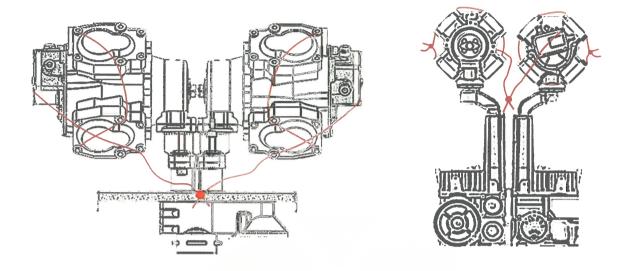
The sealing of the measurement transducer Q-Meter type 2 with Smart pulser 2
